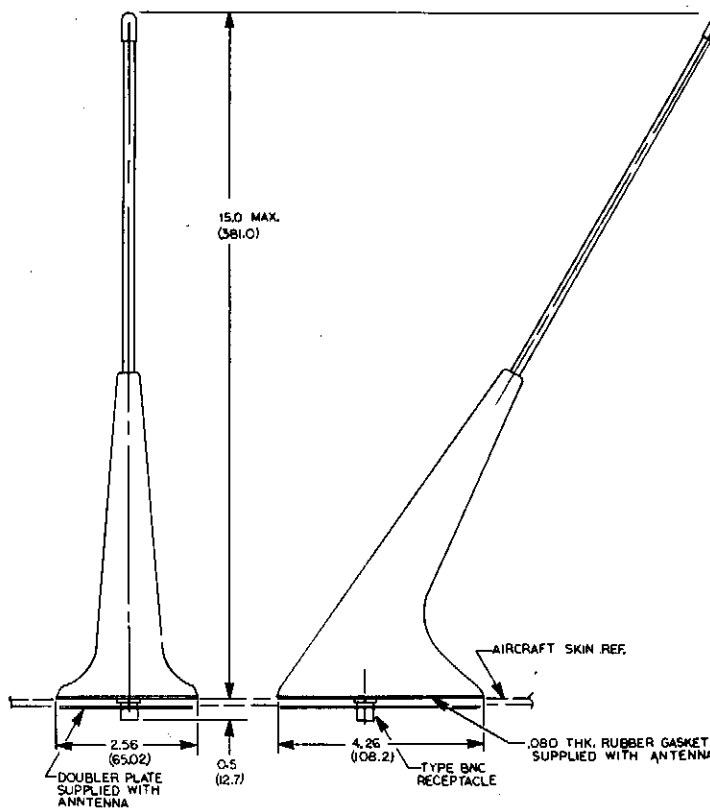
VCA-11 PHYSICAL DIMENSIONS
